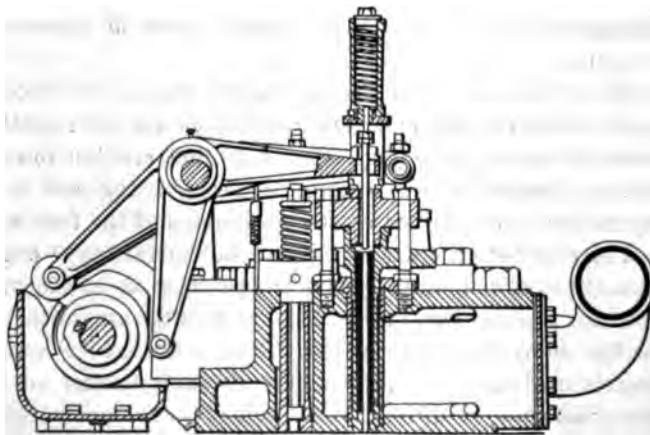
SECTION OF WILLANS-ROBINSON CYLINDER HEAD
